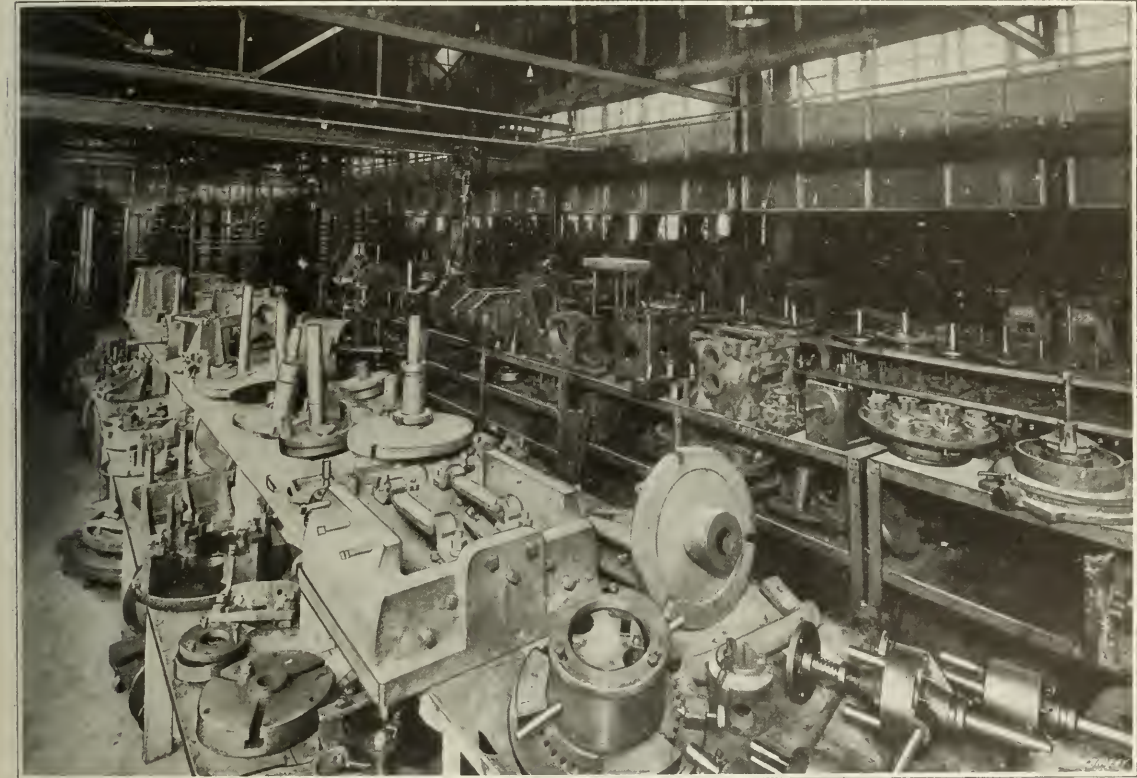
Jig and Fixture Storage Section, Gisholt Machine Co. Note Hand Power Traveling Crane for lifting and carrying Heavy Fixtures
